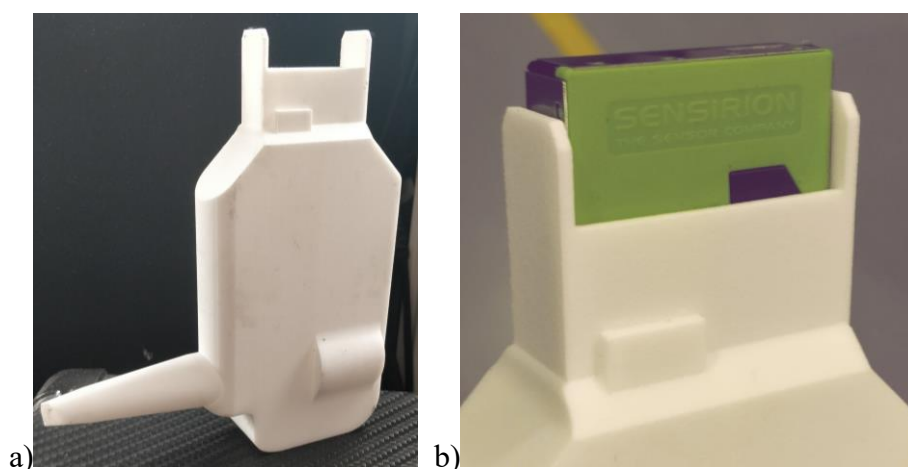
a) 3D printed PM sensor prototype, b) close-up of upper part of the prototype with the green PM sensor component inserted
